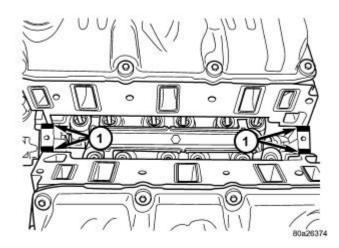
SEALER LOCATIONS Courtesy of CHRYSLER LLC
